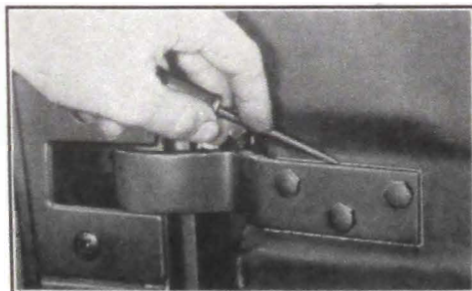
"Scribing" Position of Hinge Before Removal
